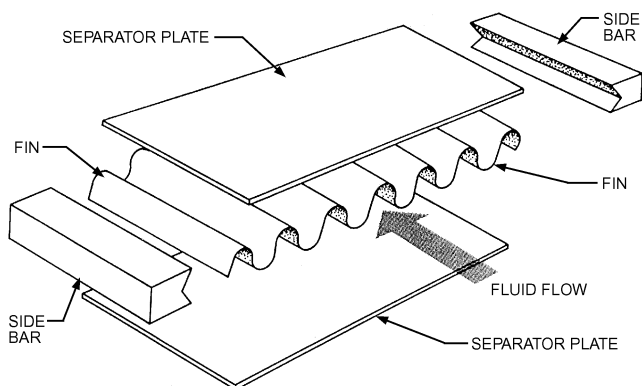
Enlarged View of One Layer of Plate-and-Fin Heat Exchanger Before Assembly
